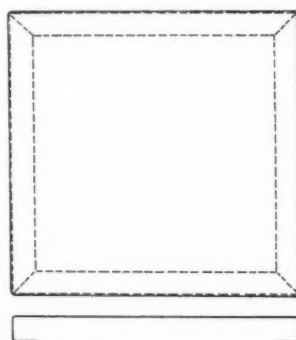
Suggested Arrangement for Holding Scraps of Block Lagging; This May Be Removed in a Unit
